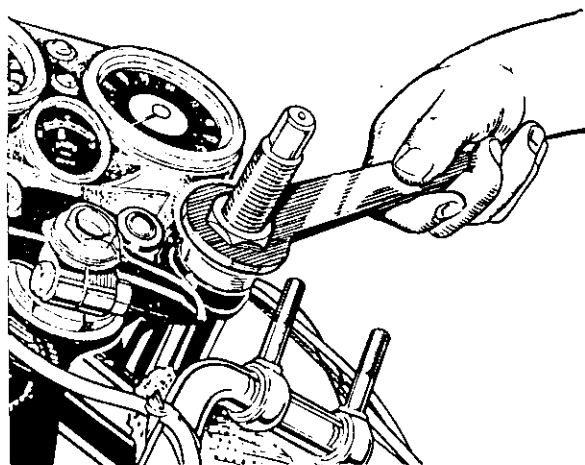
Using service tool No. 61-3824 to reassemble the forks.
